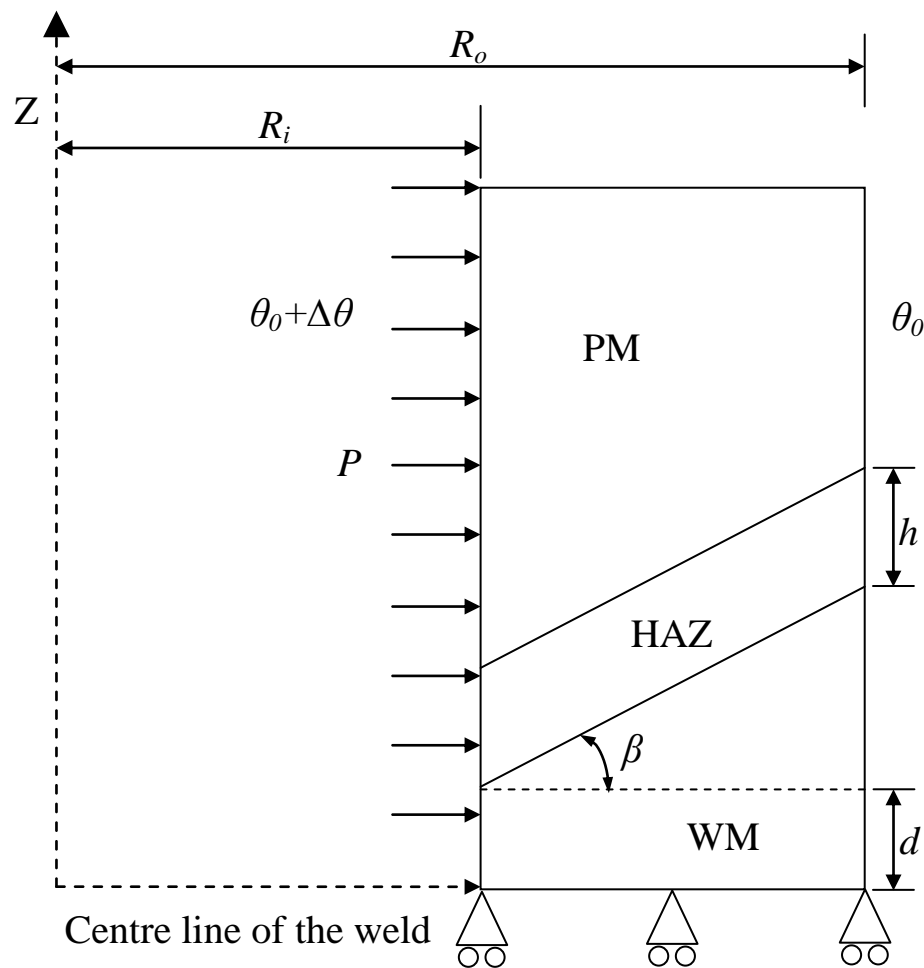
Dimensions and loading of the X20 CrMoV12-1 welded pipe
